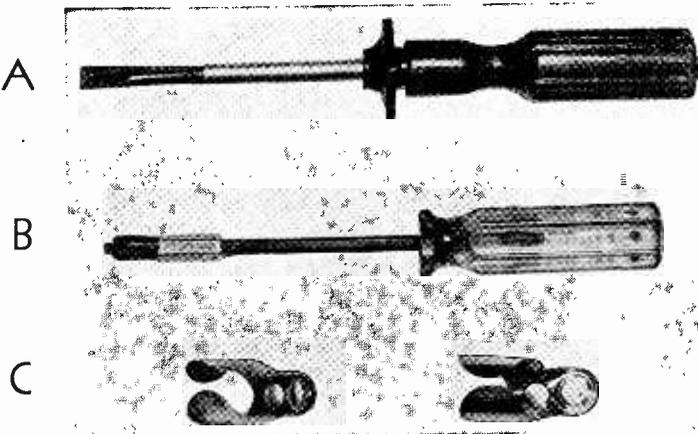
(a) "Quick-Wedge" screwdriver; (b) "Hold-Ezee" screwdriver, manufactured by Upson Brothers, Rochester, New York; and (c) "Finger-Wrenches," which are offered by the Radio Corporation of America through their local distributors.
